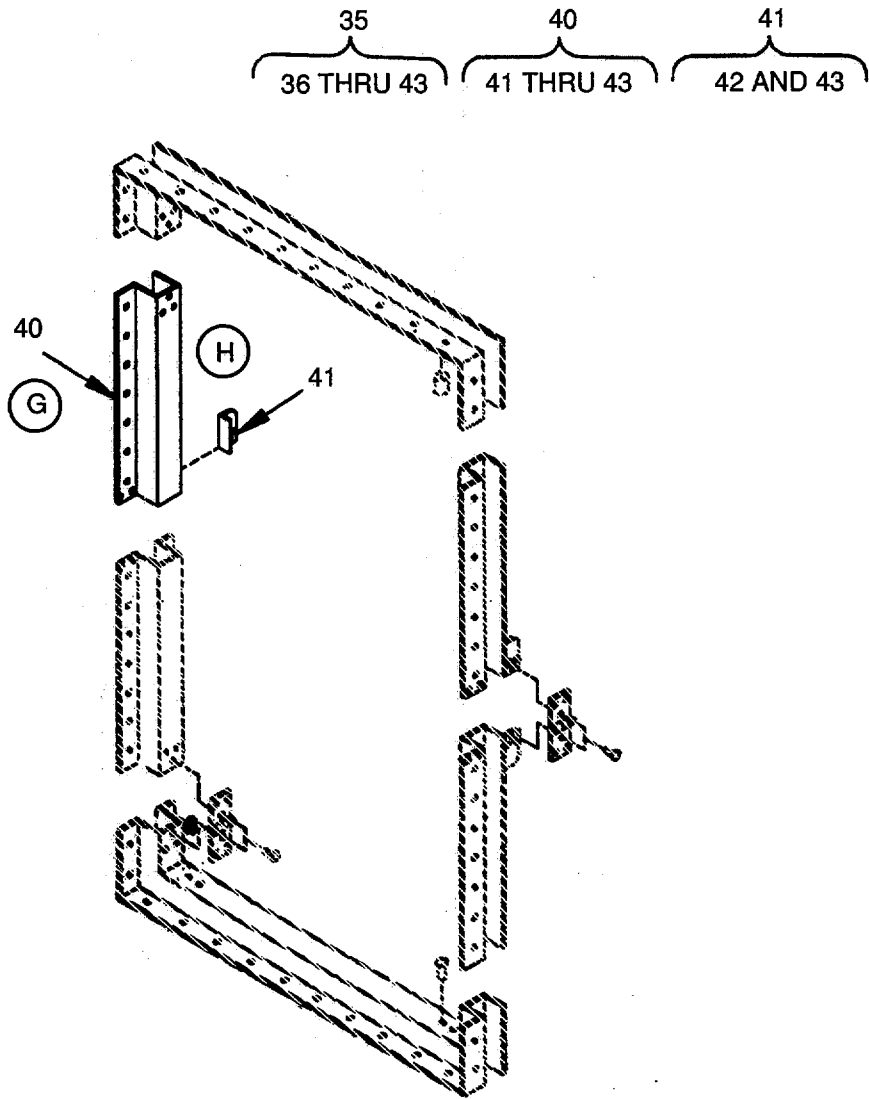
FRAME ASSEMBLY (ISO) (Sheet 3 of 3)
